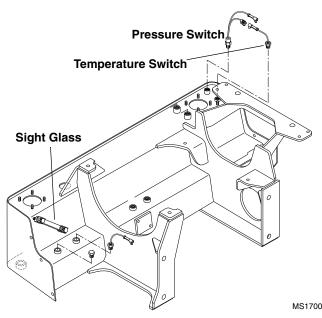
Location of the hydraulic oil filter pressure switch, hydraulic temperature switch, and hydraulic oil sight glass.
